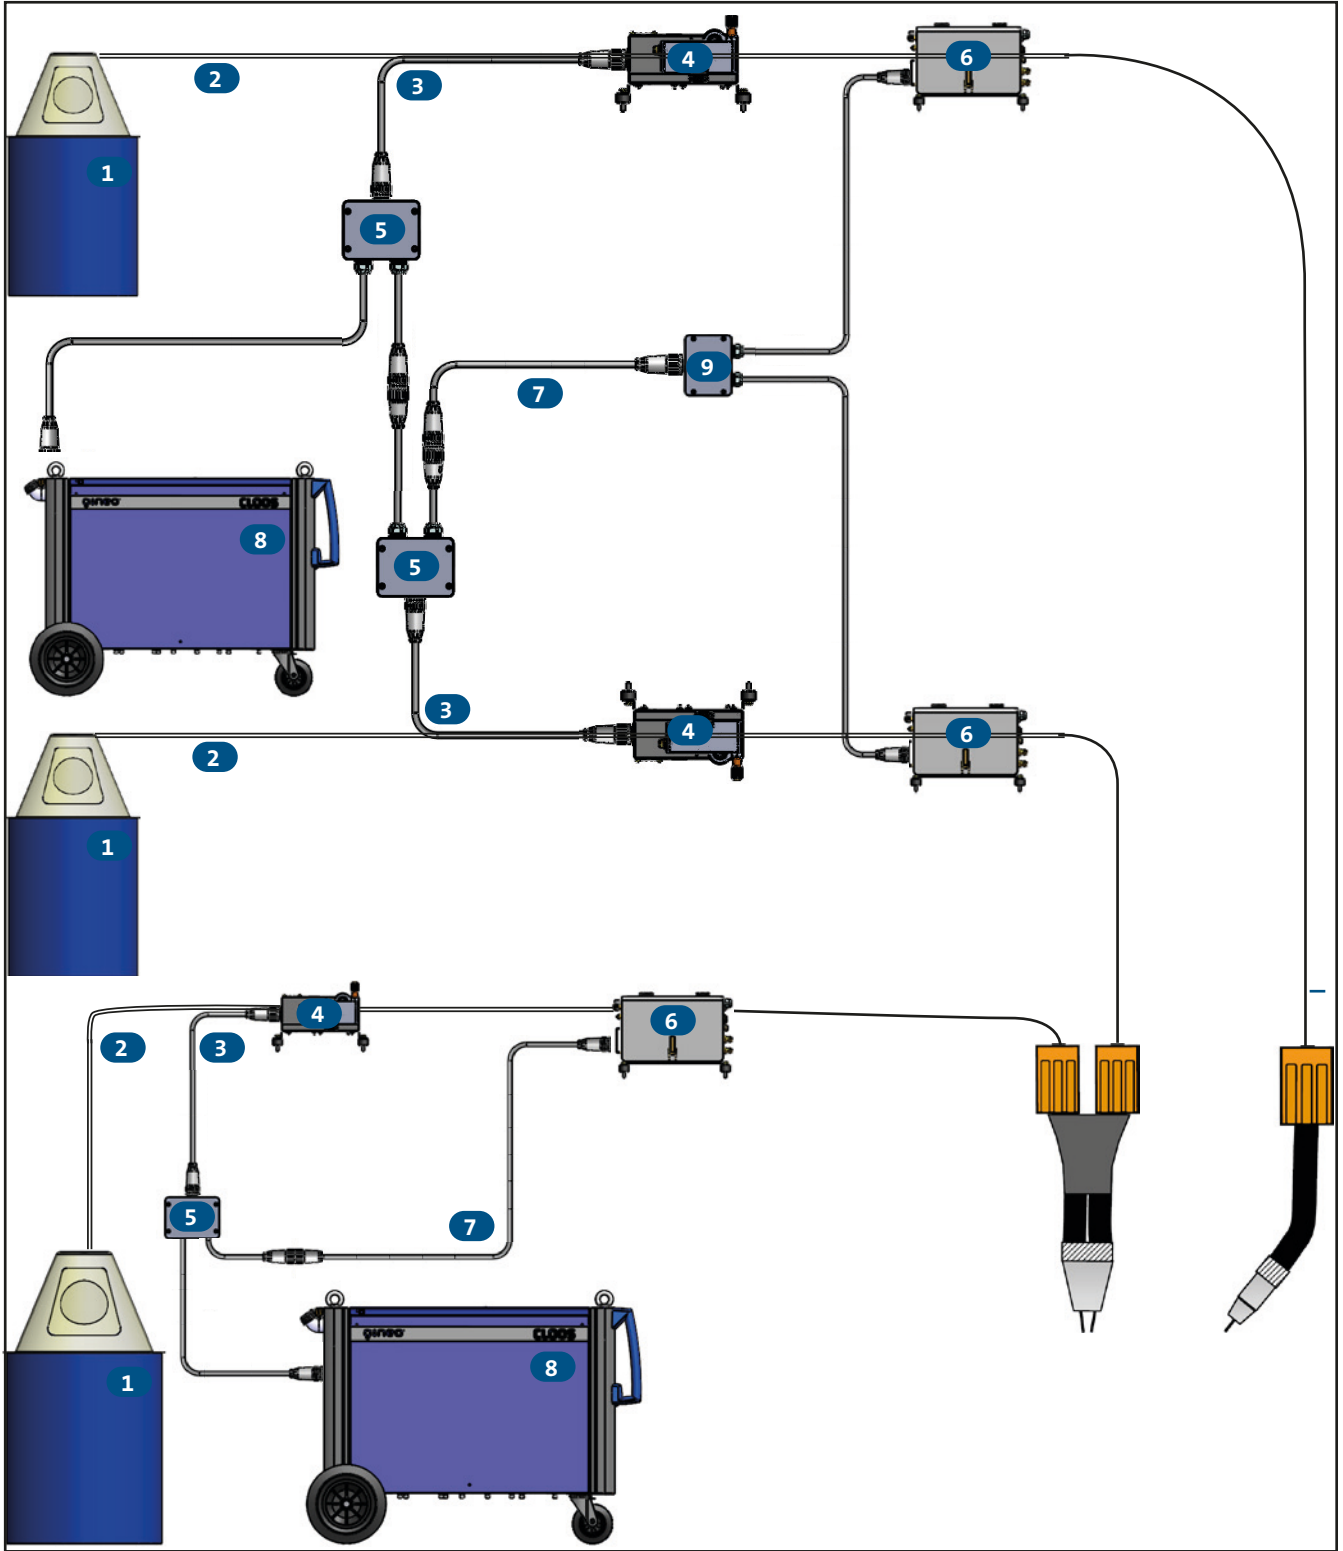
QWD-B connection diagram for the Tandem welding process with additional single wire welding process
